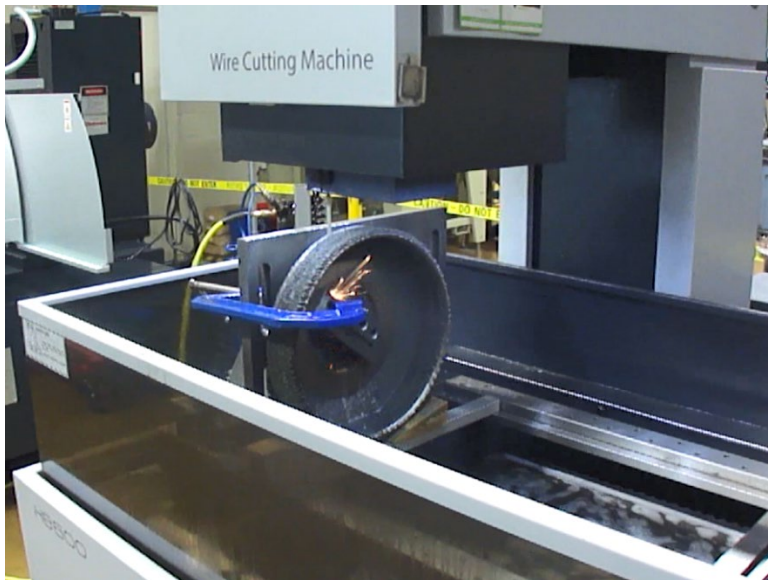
Wire electrical discharge machine cutting a metal part from a build plate. Photo by NIOSH.
